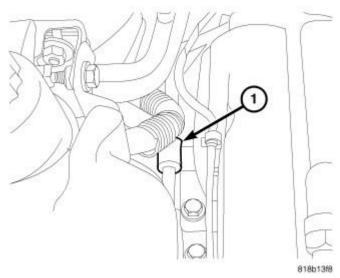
Right Engine Mount Assembly Courtesy of CHRYSLER GROUP, LLC
